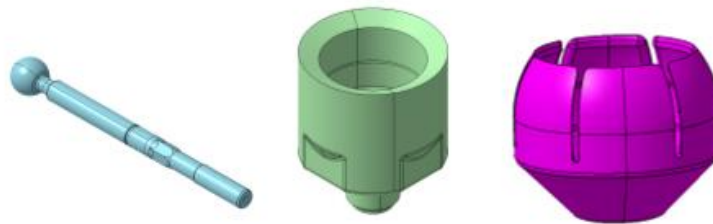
Part of the inner tie rod assembly, from left to right: ball stud, housing and ball race.
